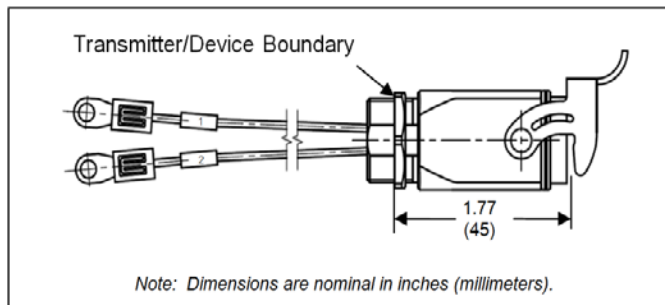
Dimensional Drawing of Instrument Side, Stainless Steel
